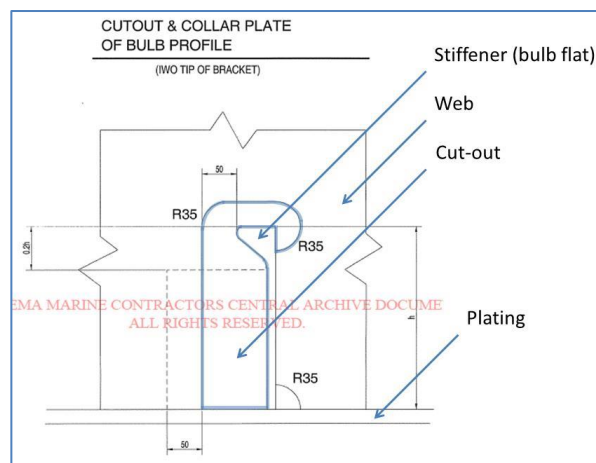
Cut-out web of beams in order to place beams over the stiffeners (applied on the H-541) [8]
